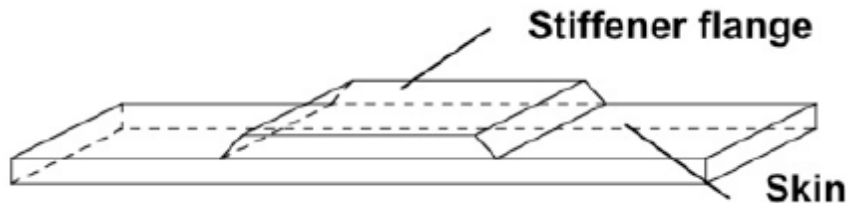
Skin/stiffener flange debond specimen configuration [59]
